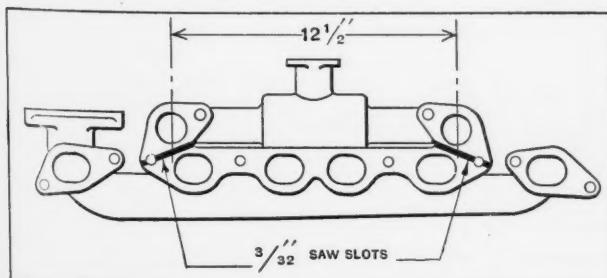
Outline of Automobile Manifold in which Slots are Milled by the Machine Illustrated in Fig. 1
